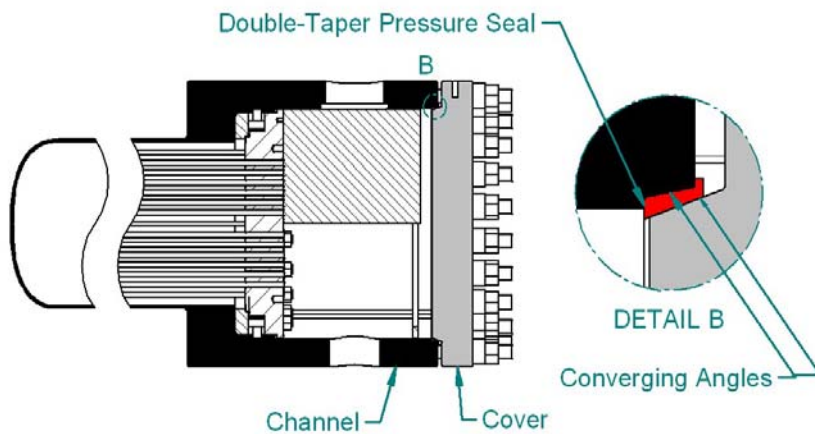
Schematic of exchanger design with double taper pressure seal⁵
